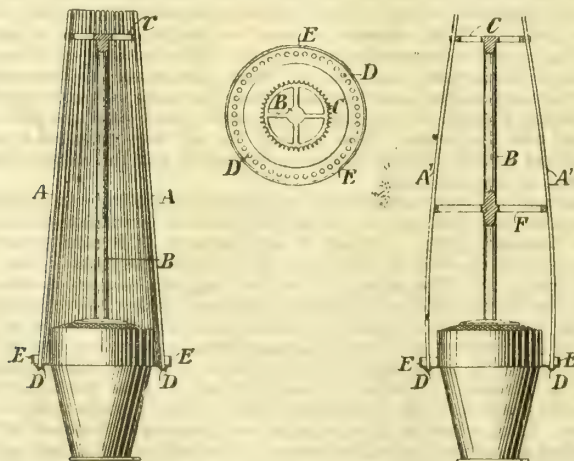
represents (in part sectional elevation) the top of an incandescent burner with such a construction of mantle in position. Fig. 2 is a plan
